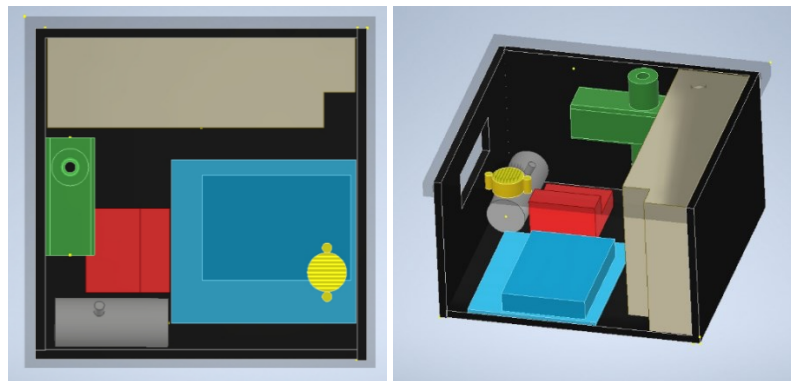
3D model of the NPWT prototype: top view (left) and perspective view (right).
